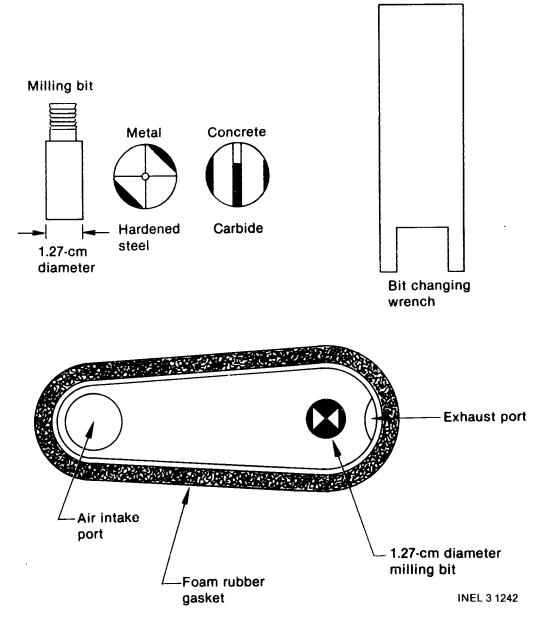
Surface sampler vacuum chamber and milling bits schematic.
